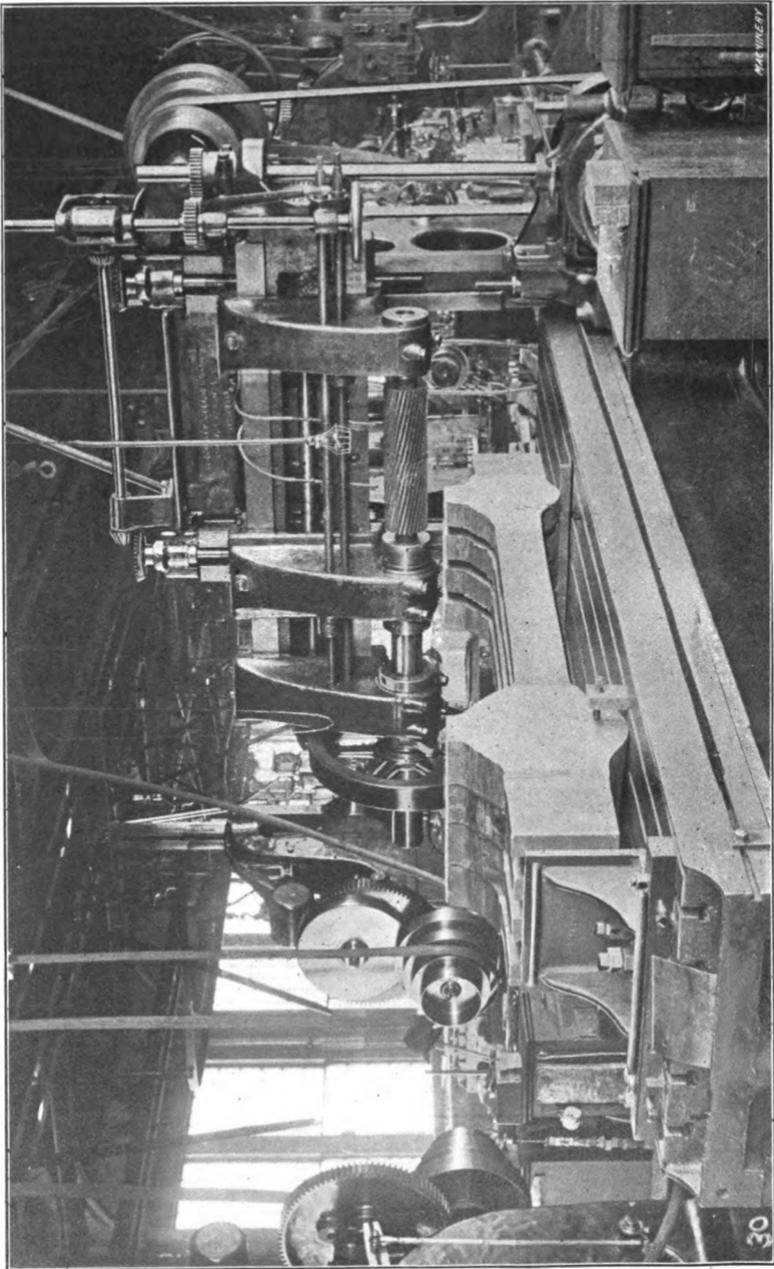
Cutting the Edges and Outlining the Heads of the Intermediate Rods on the Slab Milling Machine
